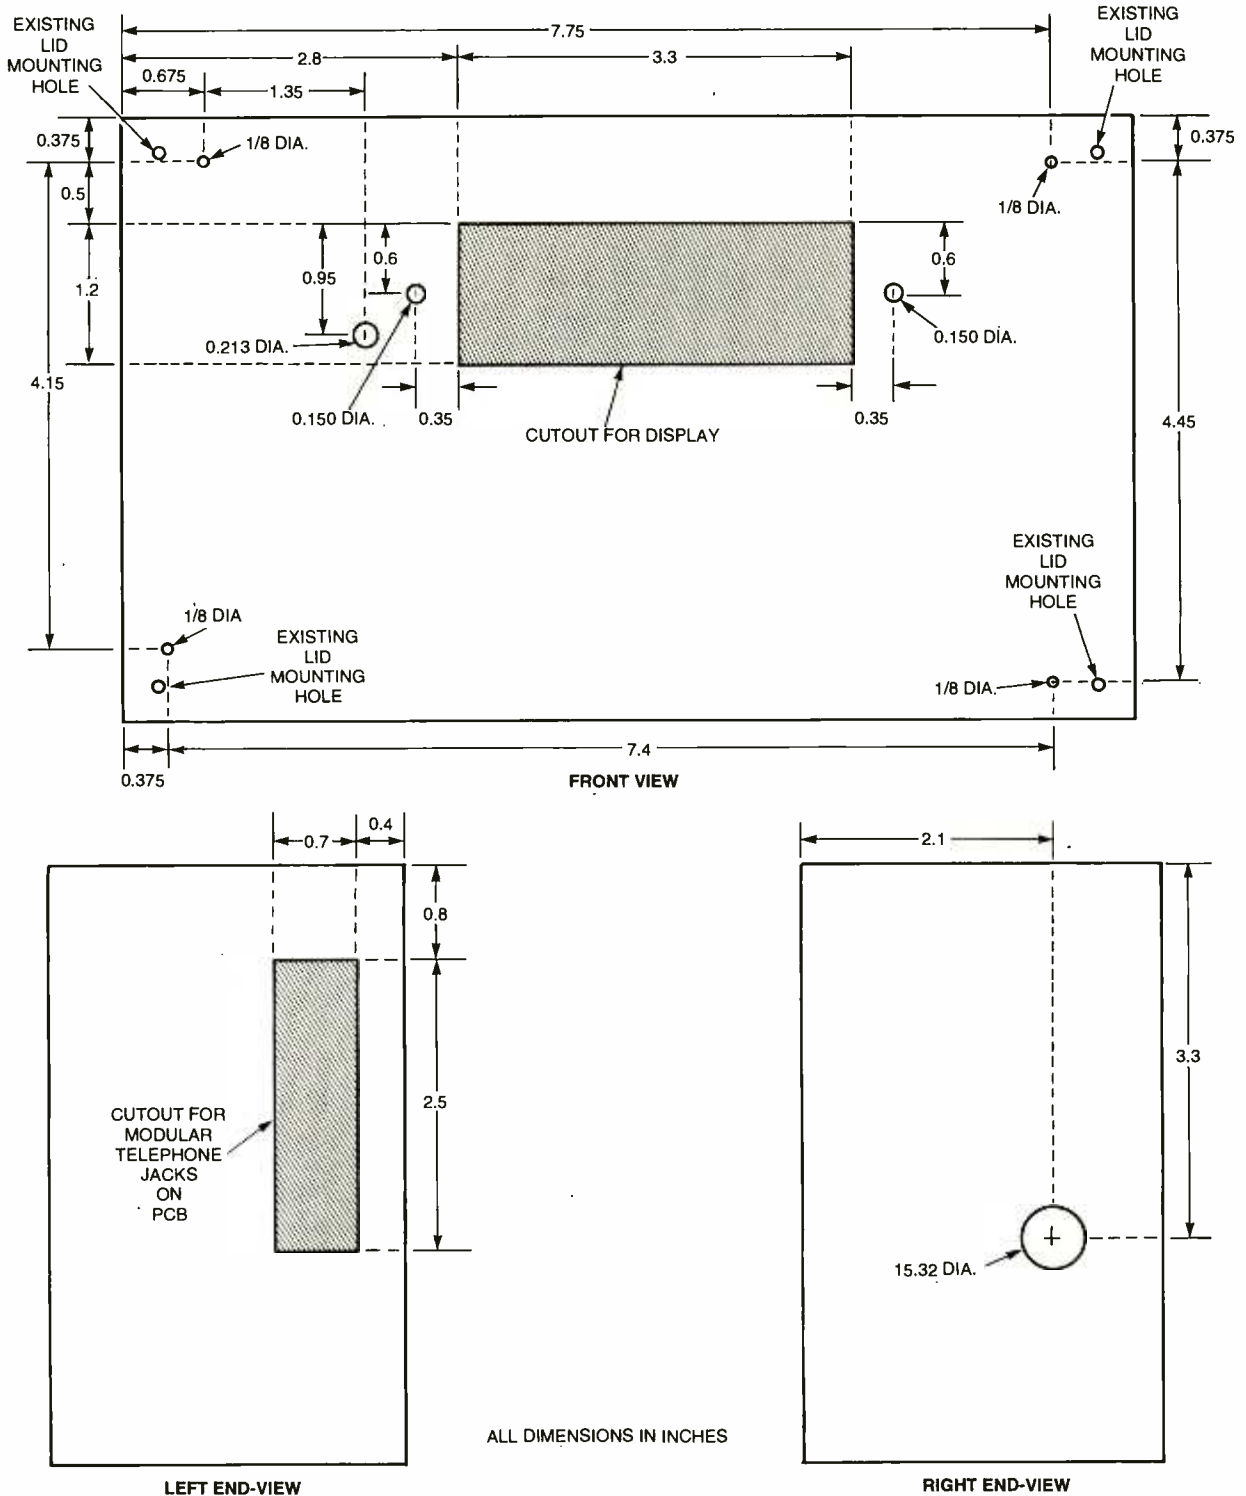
This drawing will guide you in drilling the enclosure holes and cutouts. Follow the dimensions carefully to insure that everything lines up when the circuit board is fastened to the enclosed lid.
